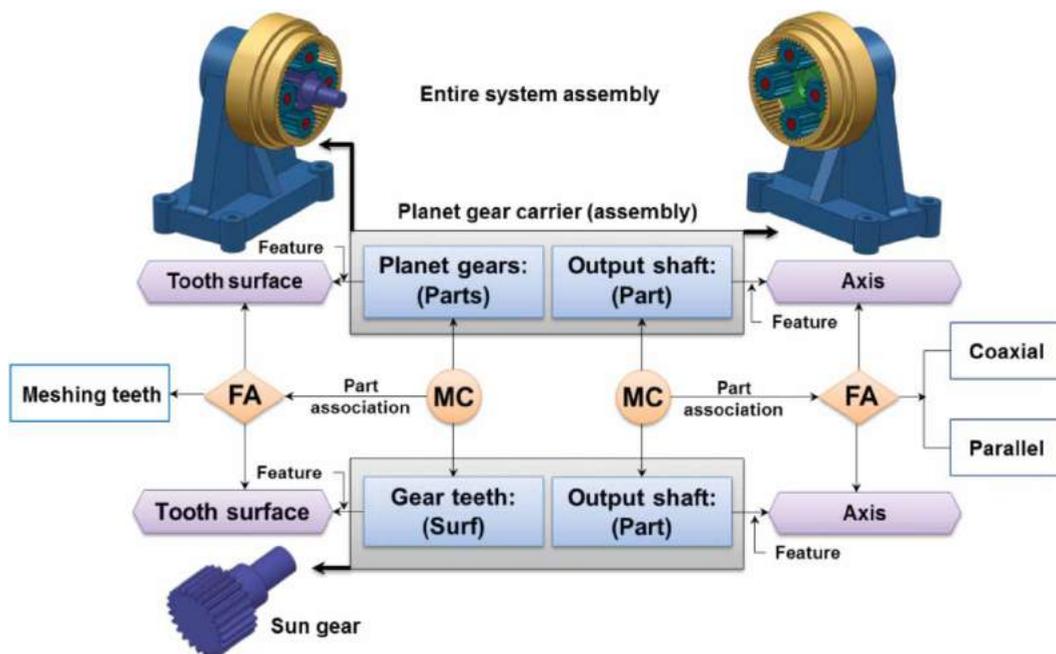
Assembly relationships between sun gear and planet gear carrier assembly [8].
